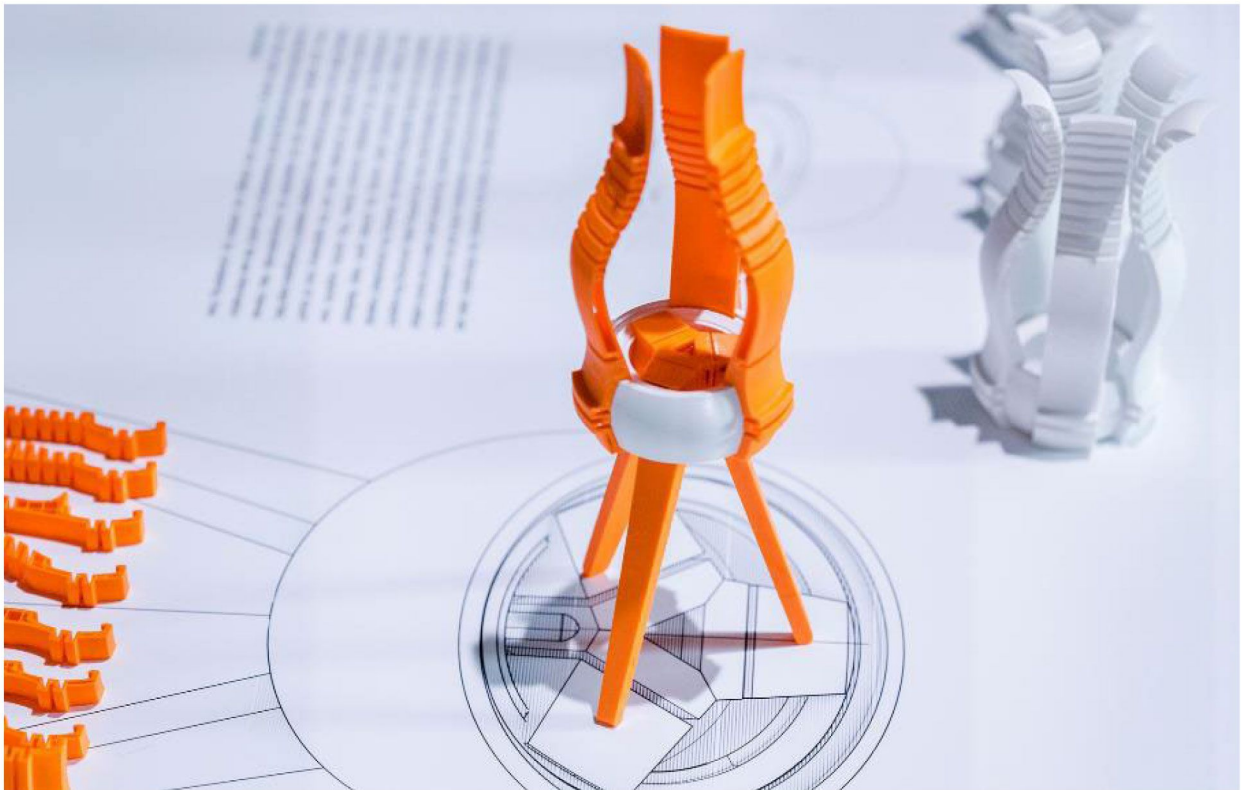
3D-printed prototypes and technical drawings. Photo by Màrk Lakos
